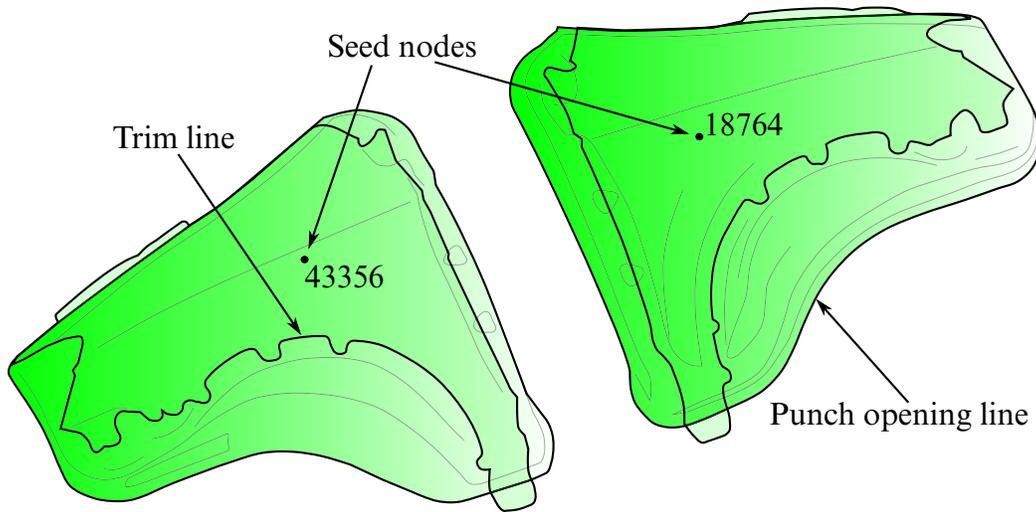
Trimming of a double-attached part (NUMISHEET2002 Fender Outer).
